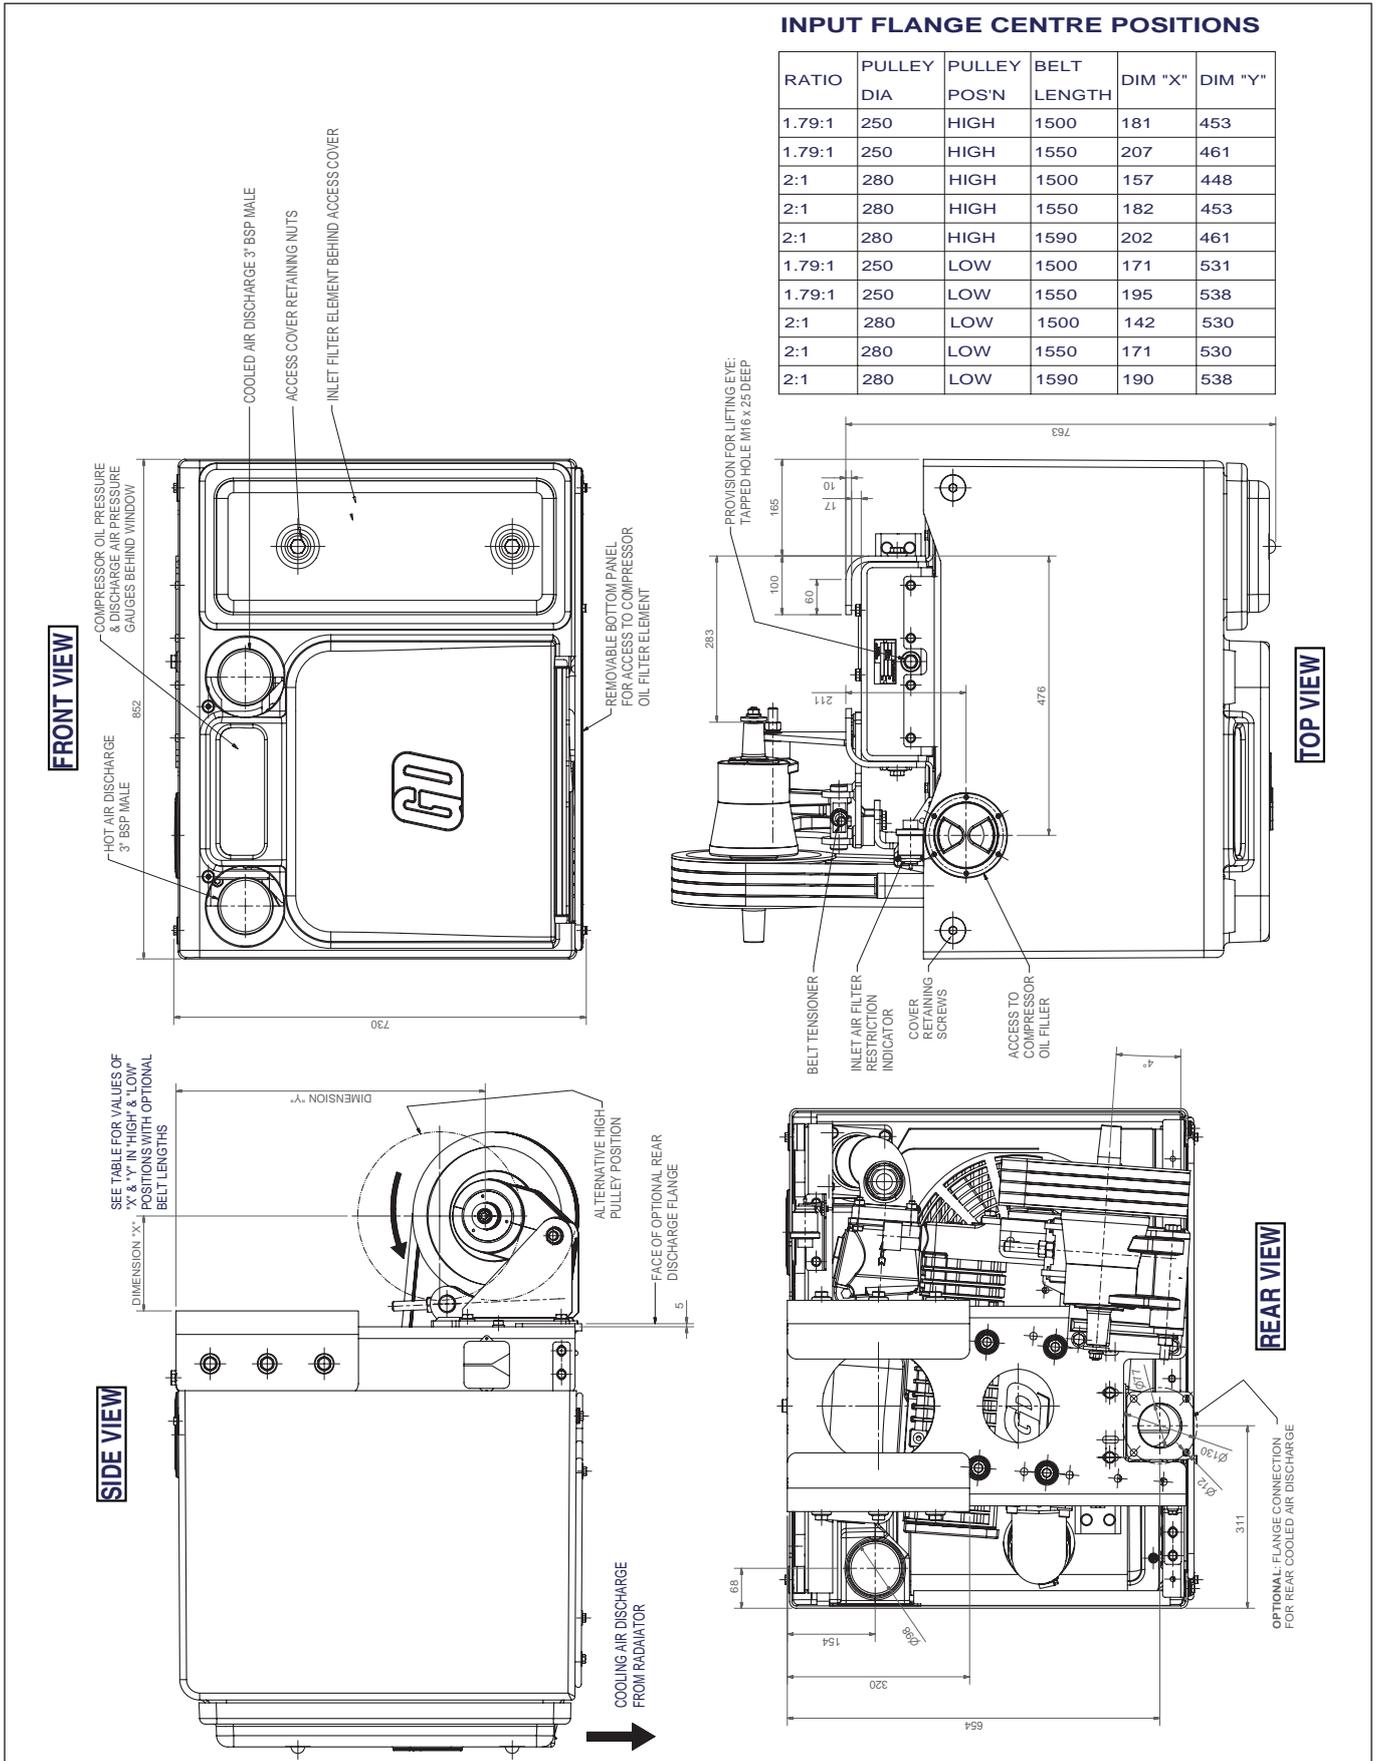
General Arrangement Drawing - BL1000 Anti-Clockwise (Left Hand) Rotation Package (Pulley Shown in Low Position)
